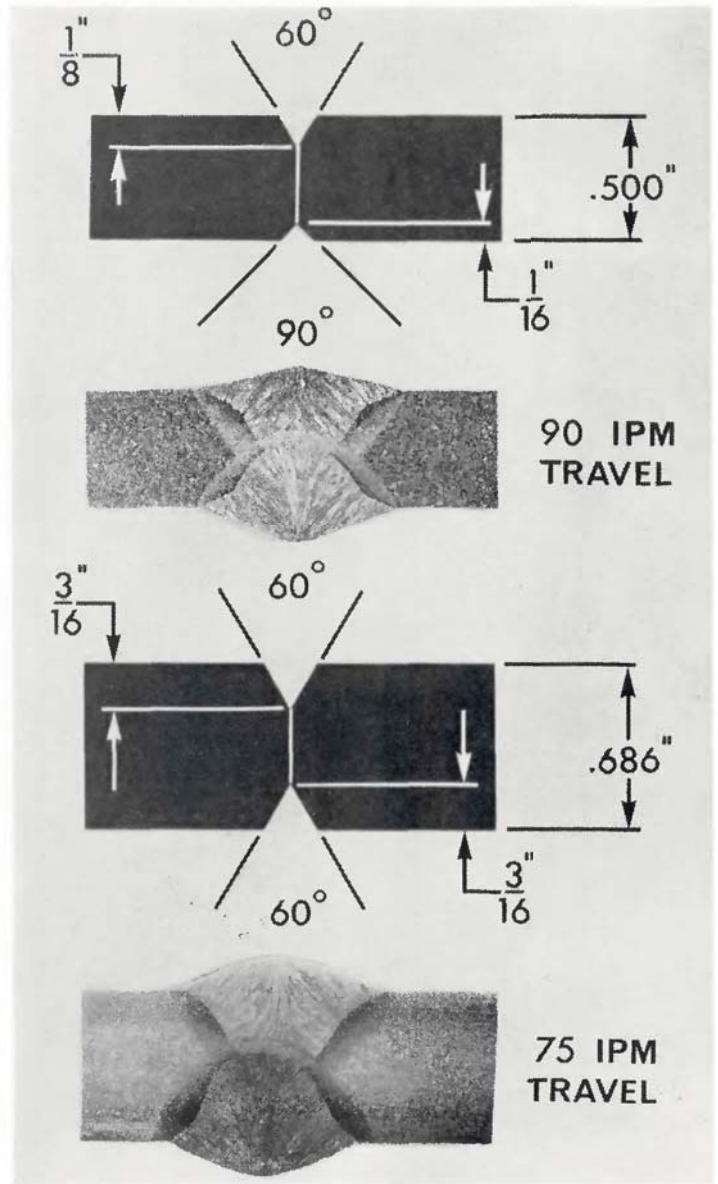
Joint designs and weld cross sections for 0.500 and 0.686 in. thick plate
